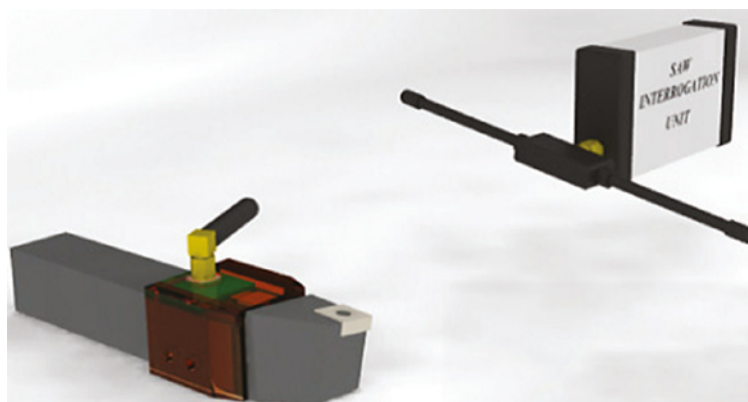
Tool holder with instrumented SAW for measuring cutting force
